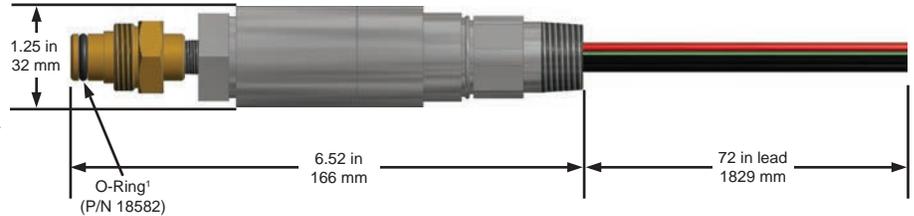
XP Low-Pressure Supervisory Switch Assembly
